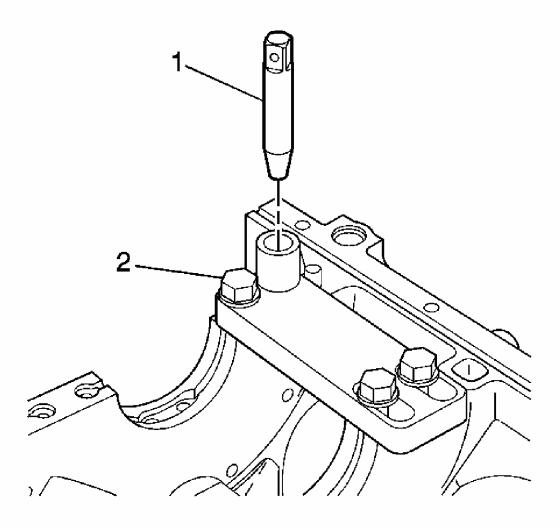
Positioning Alignment Pin - Crankshaft Main Bolt Hole Courtesy of GENERAL MOTORS CORP.
